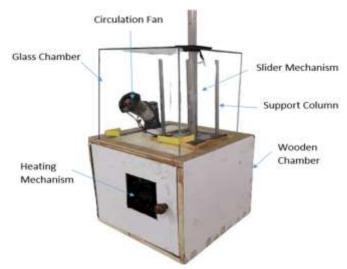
Vapour smoothing designed for commercial finishing of FDM parts
